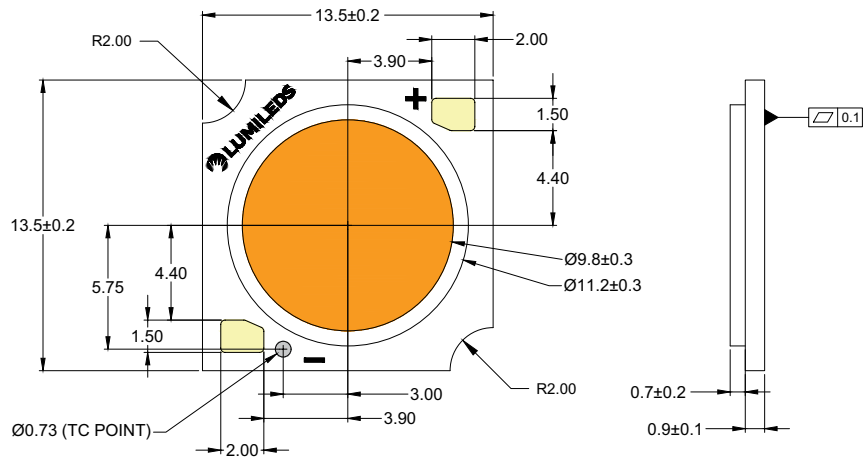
Mechanical dimensions for L2C6-xxxxxL02x0900, L2C6-xxxxxL03x0900 and L2C6-xxxxxL04x0900.
